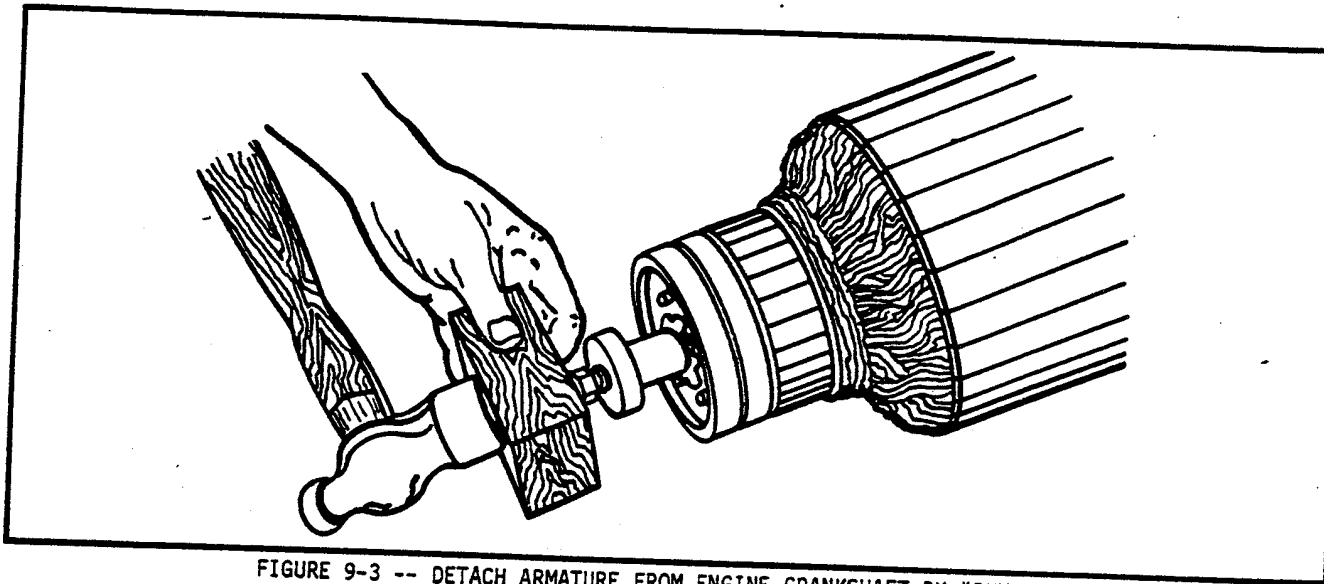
DETACH ARMATURE FROM ENGINE CRANKSHAFT BY "BUMPING"
